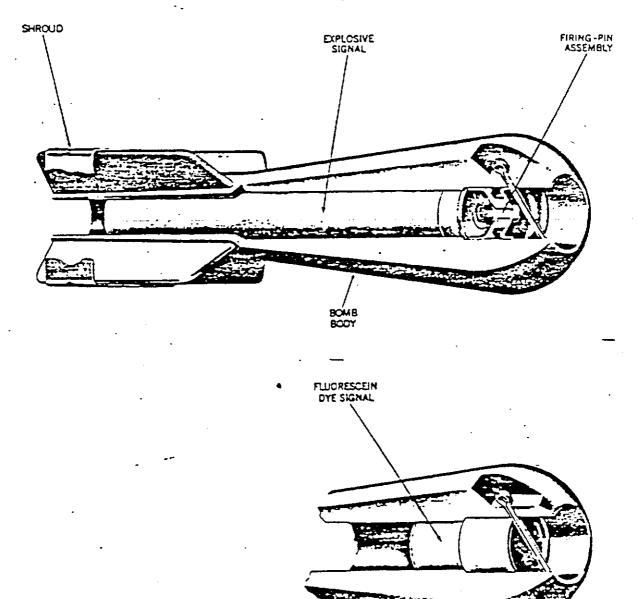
3-lb Miniature Practice Bomb AN-Mk 23 Mod 1, Cutaway View and Detail Showing Signal Mk 5 Mod 0 Installed.
